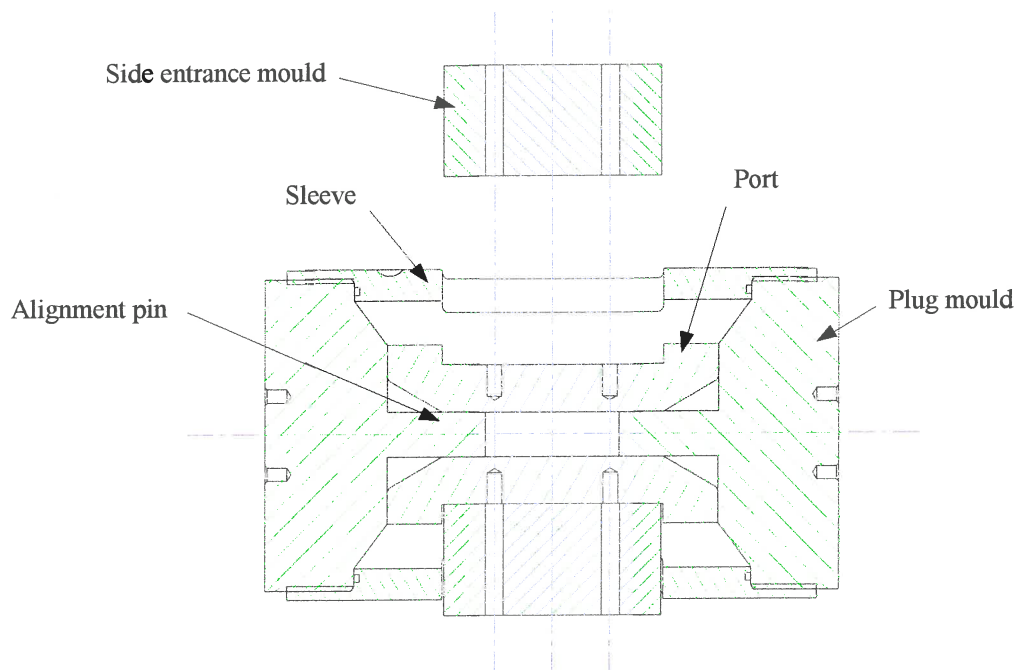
Mould assembly for the casting of the polyurethane spring
